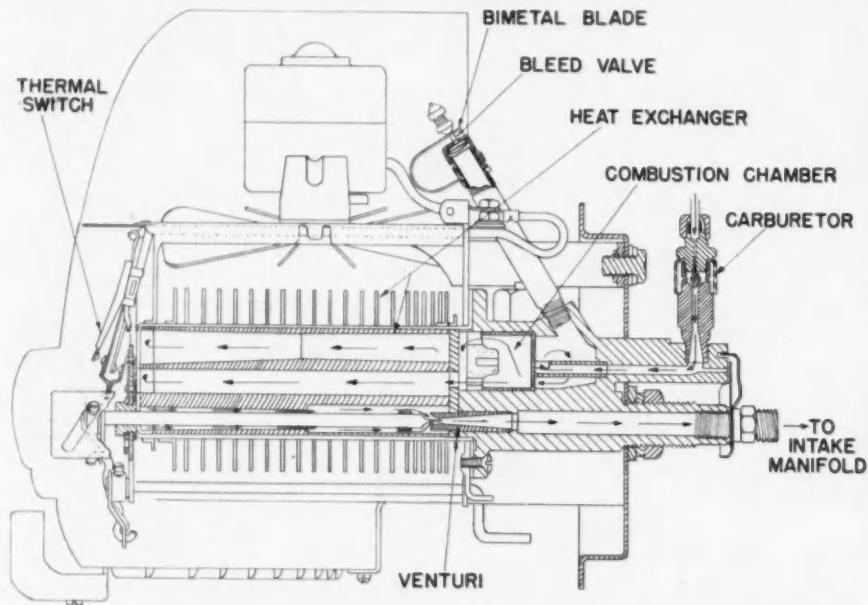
Cross-section of the Stewart-Warner Model 909 heater. The fuel, mixed with a small amount of air, is drawn into the carburetor, where additional air is added. This mixture passes into the combustion chamber and is ignited by a heated wire coil. After several passes through the heat exchanger, exhaust products pass through a flow-limiting venturi tube, then through the exhaust line to the engine intake manifold.
